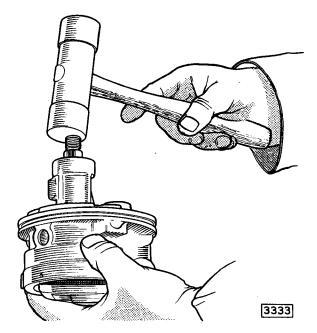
Removing the pressure plate, pump ring and thrust plate assembly.
